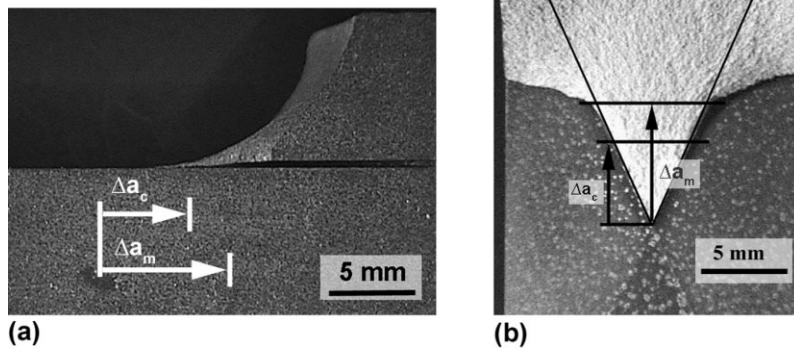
Fracture surfaces of a chevron-notched specimen (T6 condition) taken by stereomicroscopy. (a) side-view illustrating deviation of the crack plane; (b) the top-view is used to measure at what length the crack deviated (this is seen by the abrupt enlargement of the crack front beyond the limits of the chevron triangle). In all specimens deviation occurred at a crack length  $a_m$  longer than the crack length  $a_c$  used to infer the fracture toughness in the chevron-notched geometry and fracture data can be validated. Corresponding distances  $\Delta a_c$  and  $\Delta a_m$  are reported from (b) on (a).
